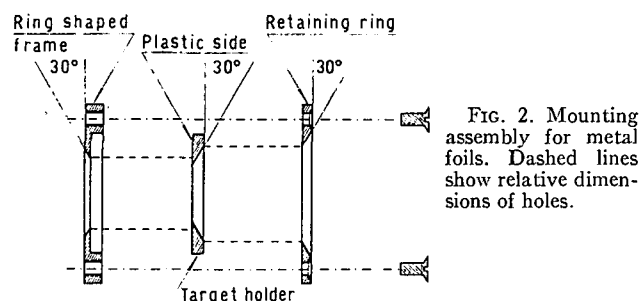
Mounting assembly for metal foils. Dashed lines show relative dimensions of holes.
